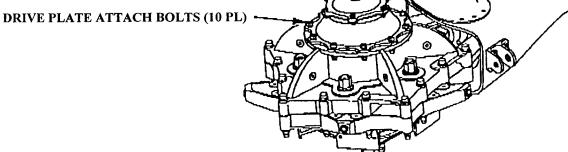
Main Rotor Upper Hub Assembly Inspection.
